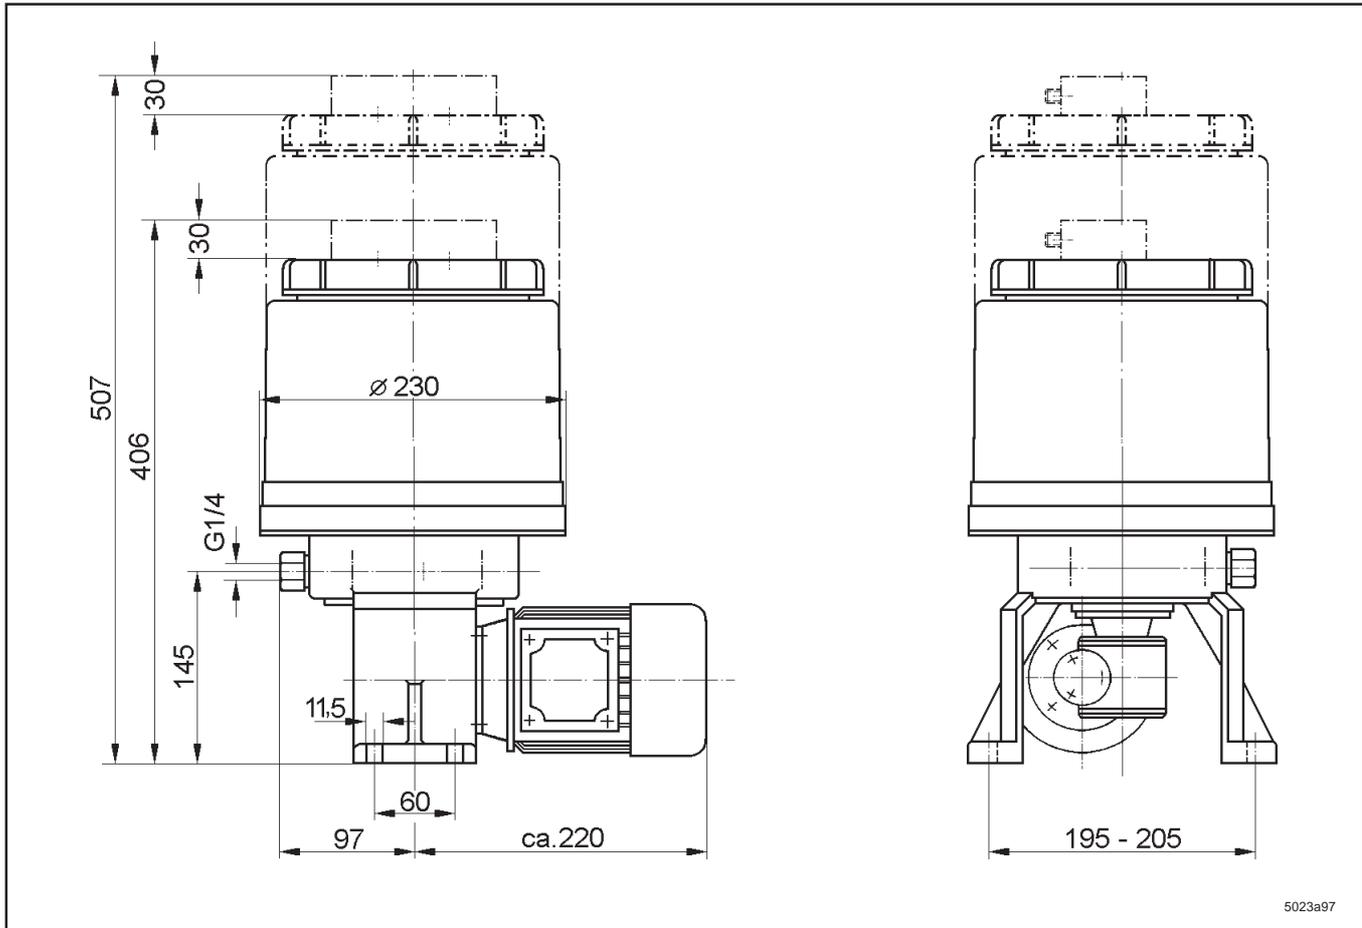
Dimensioned drawing of pump P 205, single-stage gear, 4/8 l plastic reservoir, motor drive
